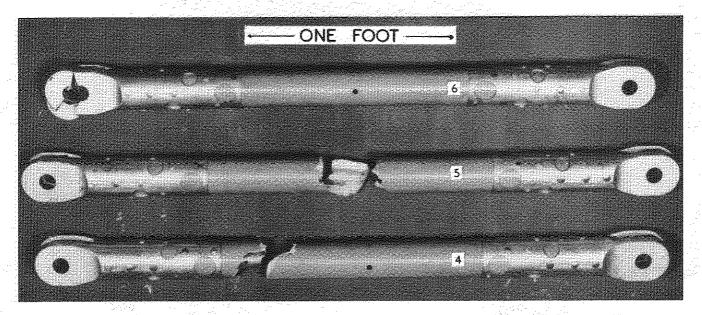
SHOWING TYPE 2 SPECIMENS OF SPAR TUBES WITH TRANSVERSE HOLES
